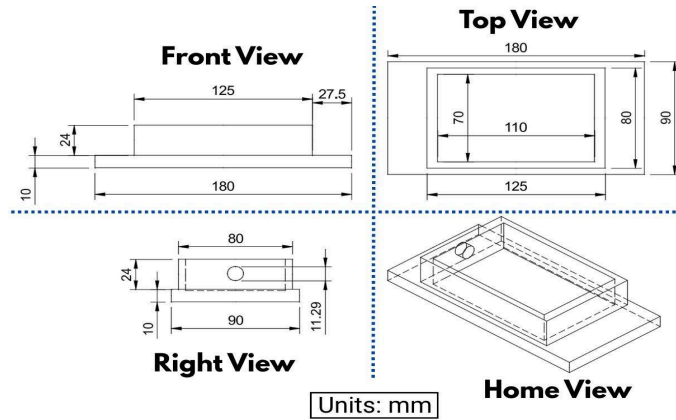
Cap assembly with optical sensor mounting port and sealing interface (units: mm).
